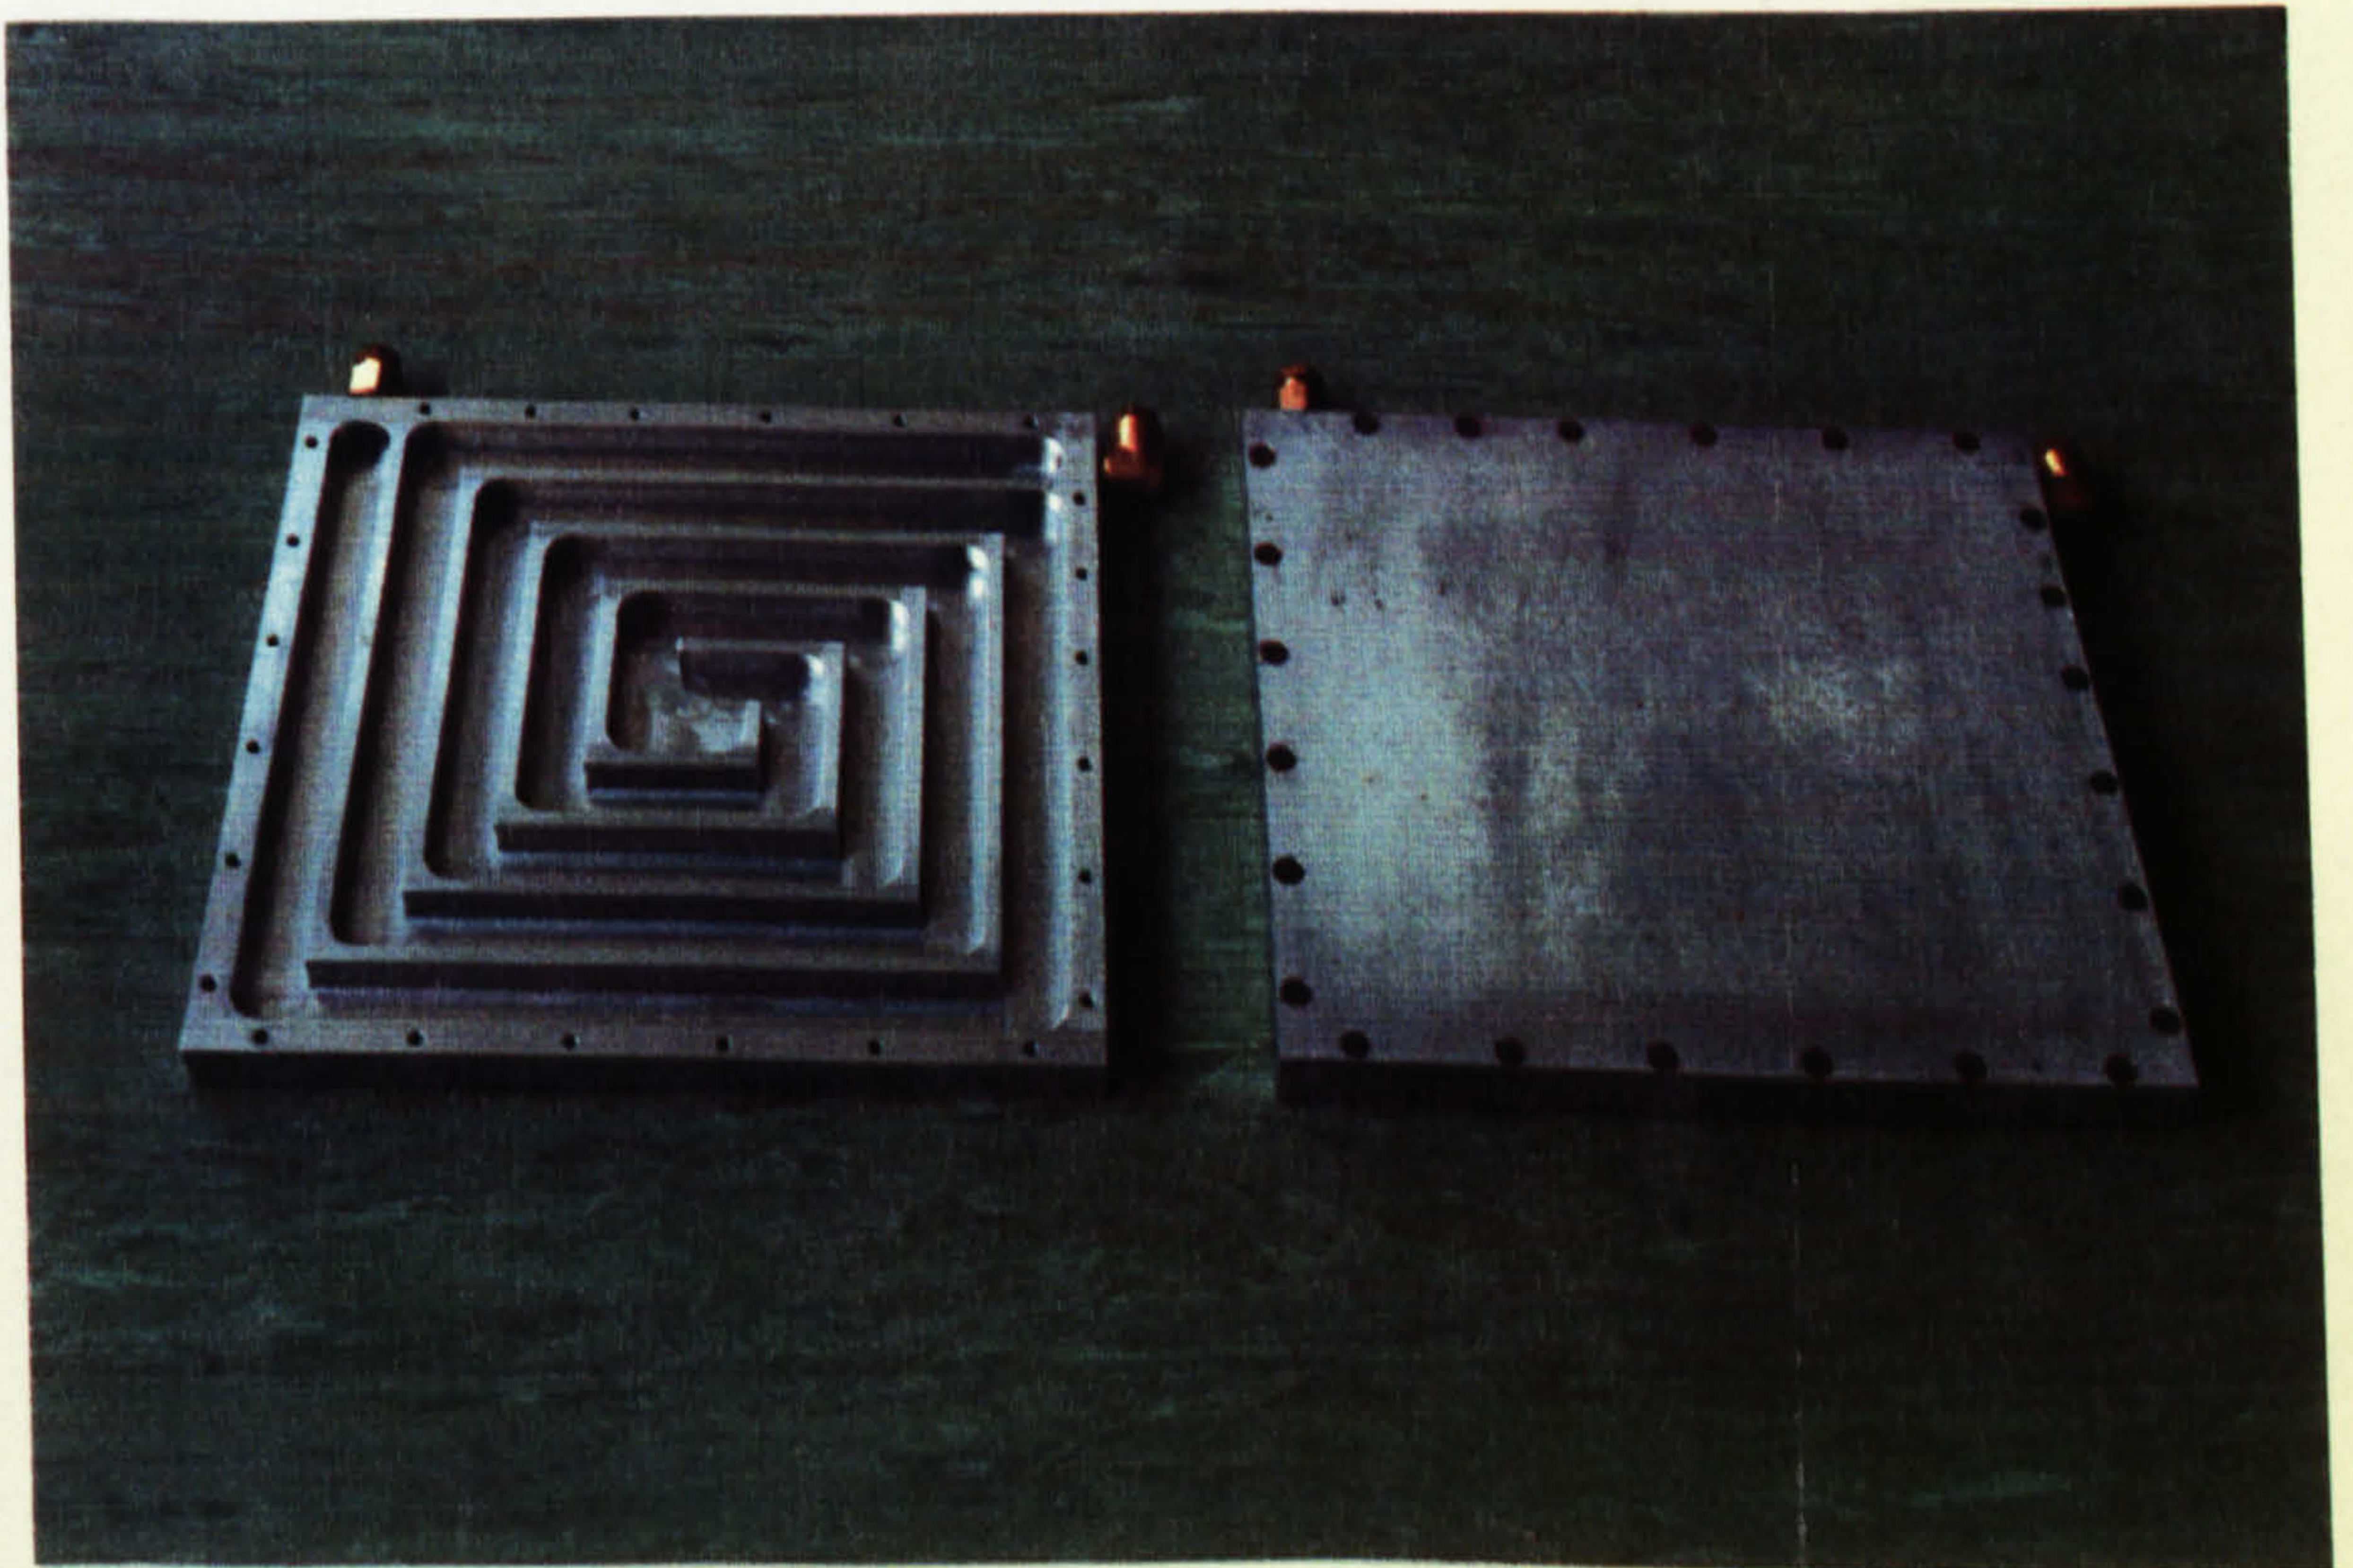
Photograph of cold plate showing reversing spiral circulation system on the left and flat surface of completed cold plate on the right.
